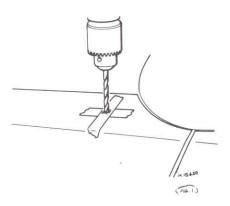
Drilling the bodywork for aerial mounting (Sec 29)
